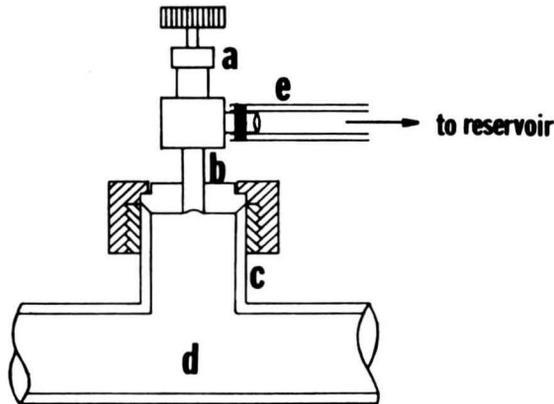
SAMPLING PORT AND NEEDLE VALVE ASSEMBLY
